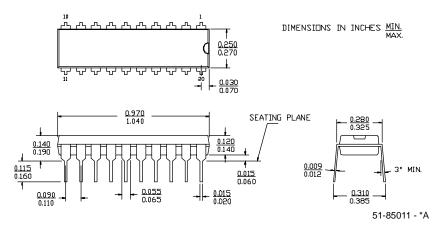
20-Lead (300-Mil) Molded DIP
